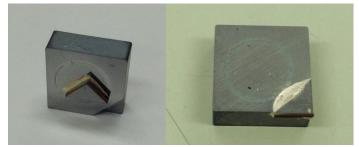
Appearance of brazed specimens Left: For shear test and cross-section Right: Actual product shape
